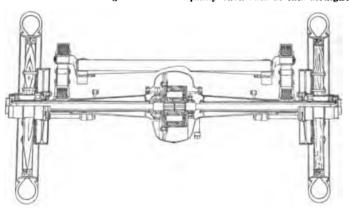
The Moore Car. Sectional view of rear axle, bevel gear drive, spur gear differential, ball beings, ball thrust, internal expanding hub brakes, casing of bevel and differential gearing has re-ovable cover to allow of ready inspection.
